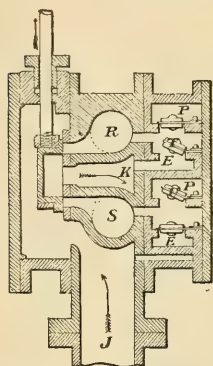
Section of Slide Valve & Relief Valves for Hydraulic Crane.
